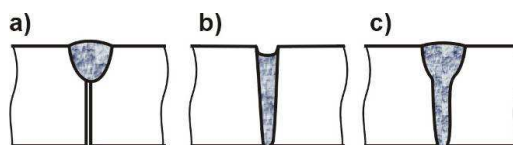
Geometry of the welded joint made with a) the MAG method, b) with the laser, c) with the hybrid method (laser + MAG) [10]
